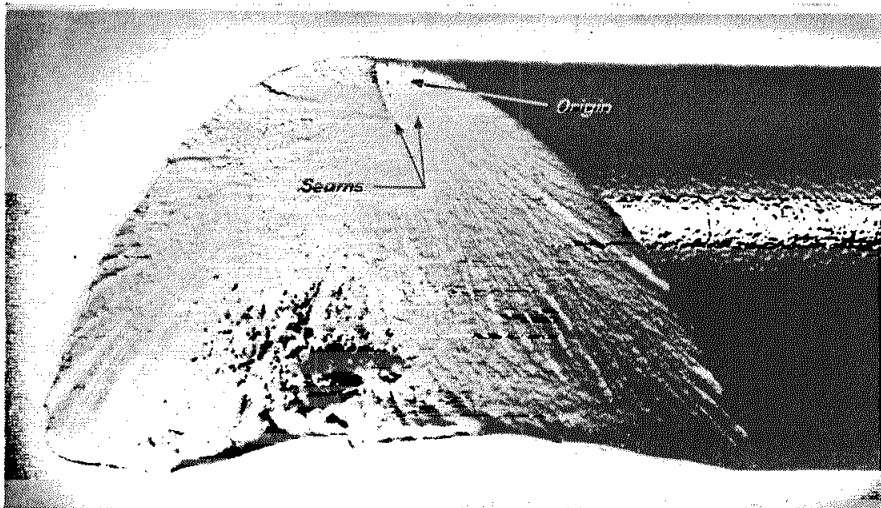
Tensile fatigue failure from repeated clockwise torsion loads has its origin below surface between short seams. Processing included shot peening followed by prestressing.
